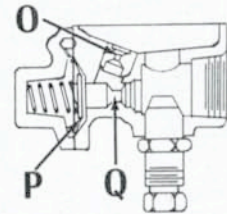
A fixed orifice (O) type economizer is built in the carburetor gas inlet casting and is operated by manifold vacuum applied in back of the diaphragm (P) which actuates valve (Q), resulting in slightly leaner mixtures at partial load ranges.
